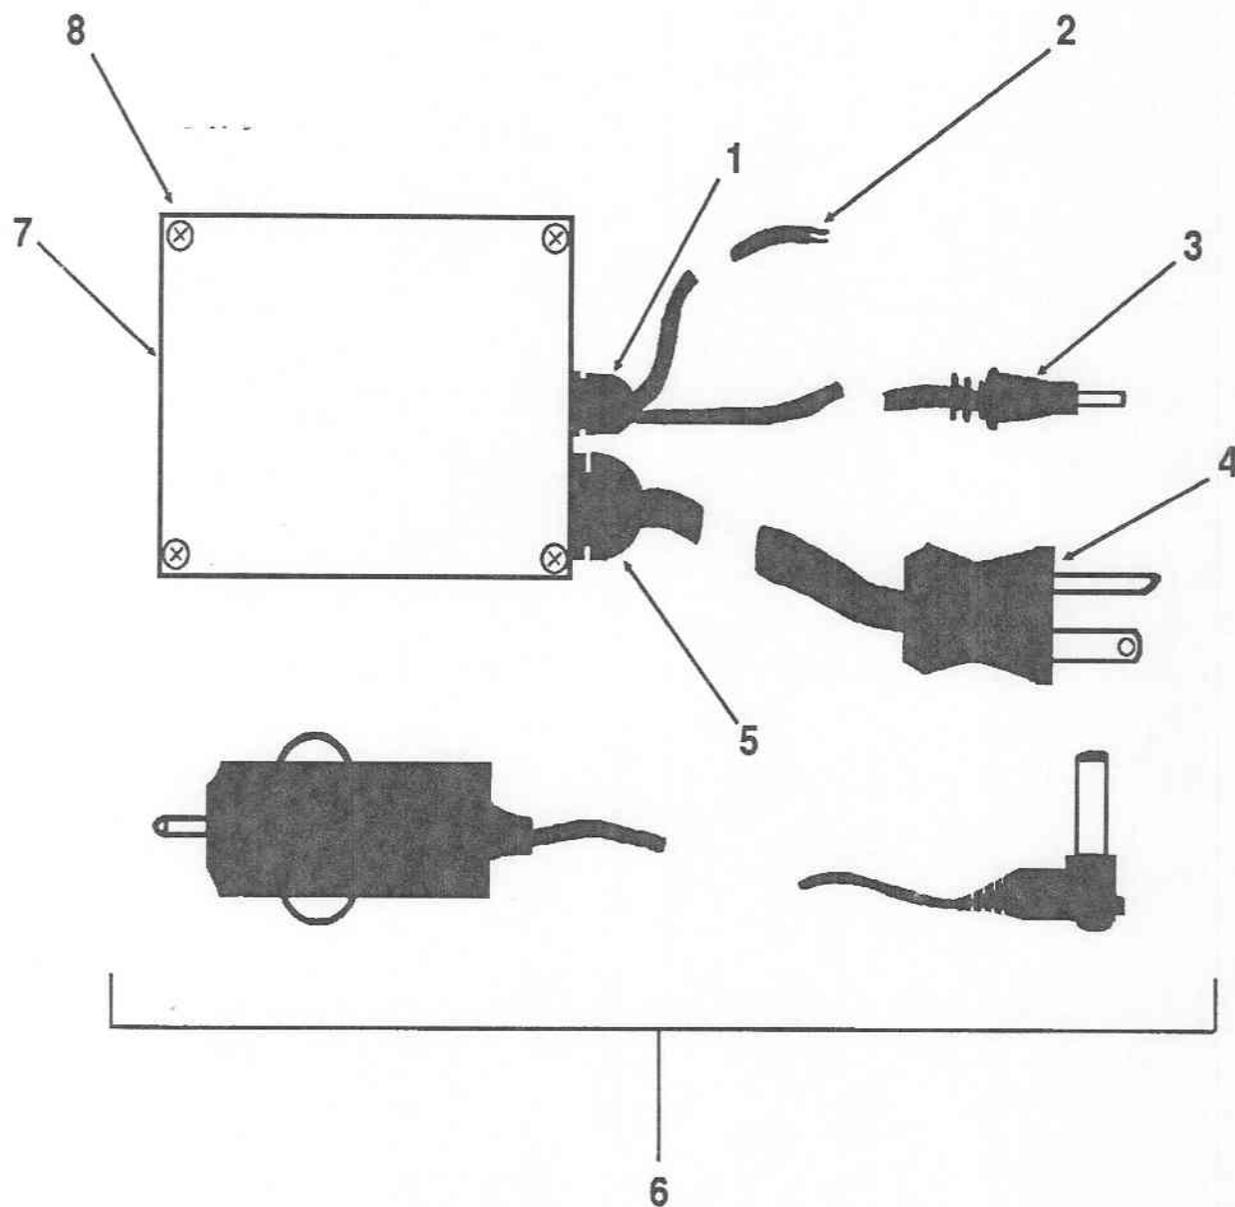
Multivoltage power supply and vehicle power cable assembly.
